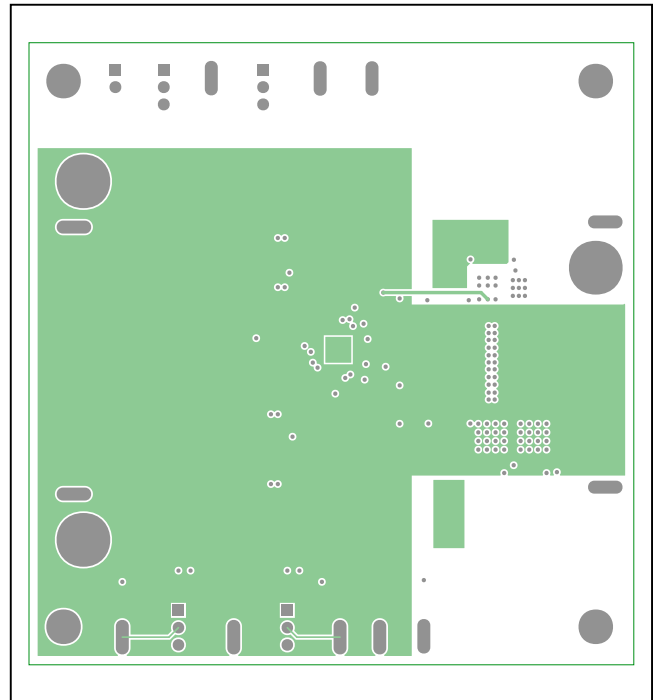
MAX17558 EV Kit PCB Layout—Inner Layer 2
